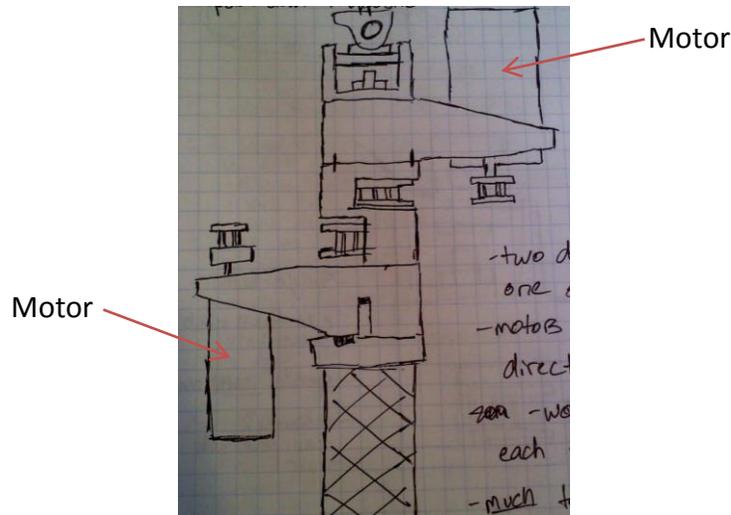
Sketch of the Disney design concept. The “Mickey Mouse” configuration of the metal is what gives this design its name. Both motors would be solid mounted with a sliding mechanism for tensioning.
